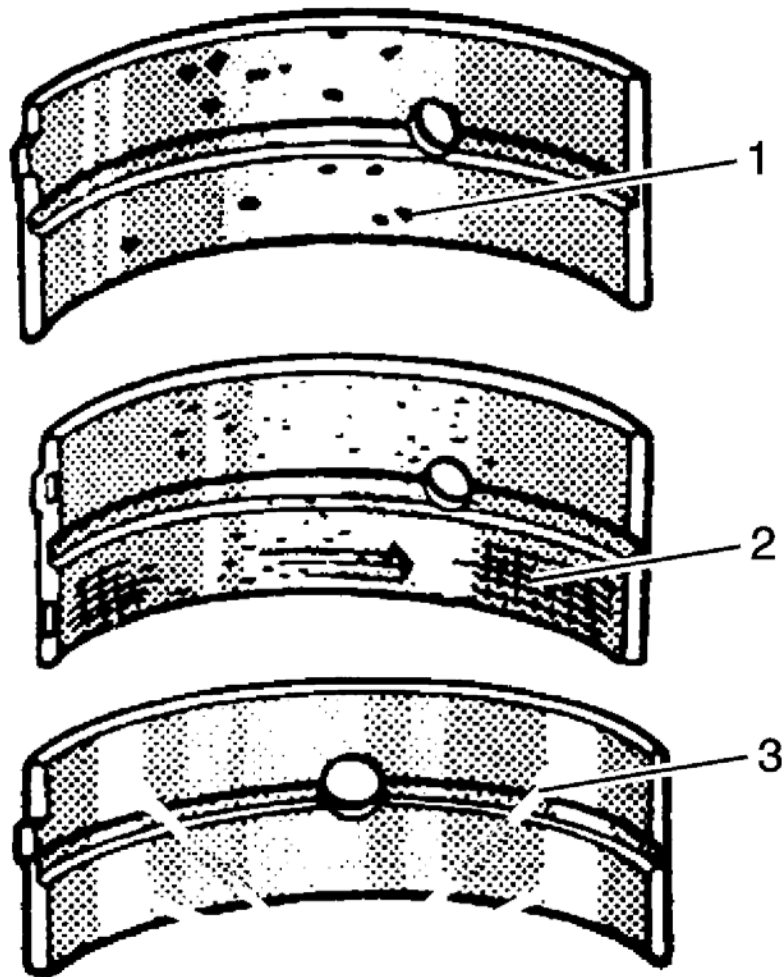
Identifying Crankshaft Bearing Damage
